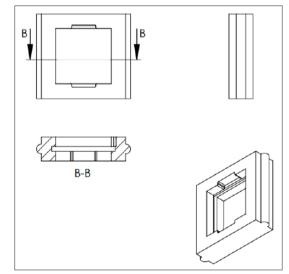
Sectional Cutaway View of the Sensor Sleeve
